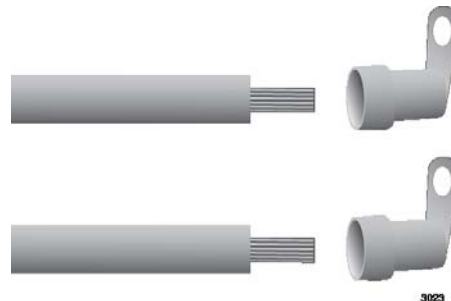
Attaching the Power Wires to the Right Angle Terminal Lugs
